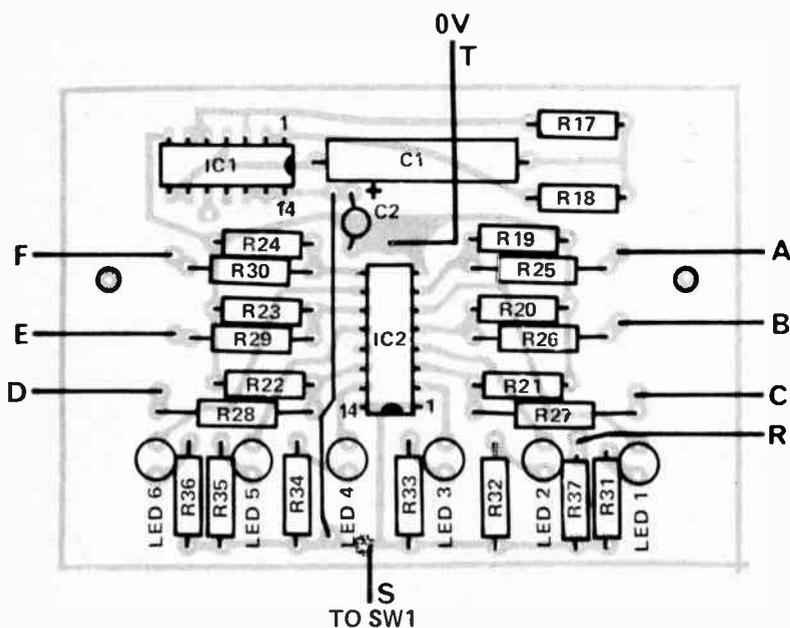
Component overlay for board ETI-123a. Note that C1 may need to be mounted on reverse side, and that the LEDs should be mounted as detailed in the text.
